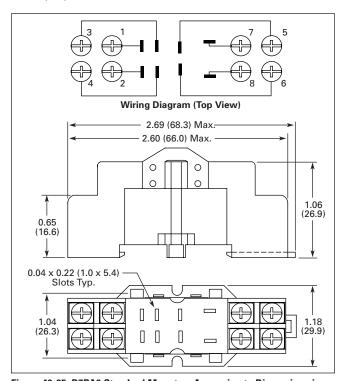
D7PA9 Standard Mount — Approximate Dimensions in Inches (mm) $\,$
